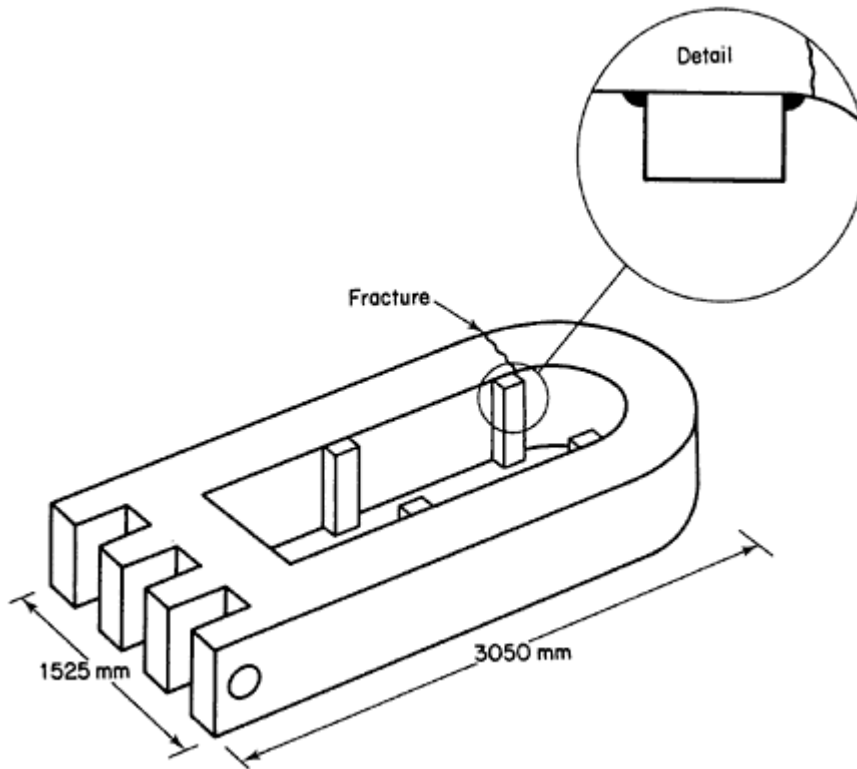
Failure of yoke piece from a 200 ton vertical plate bender. The origin of the fracture was from an intermittent fillet weld attaching a guide bar.
